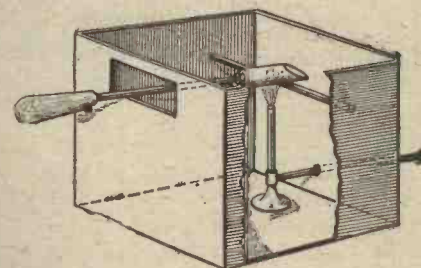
When heating a soldering iron do not place the tinned tip in the flame, but arrange things like this.
